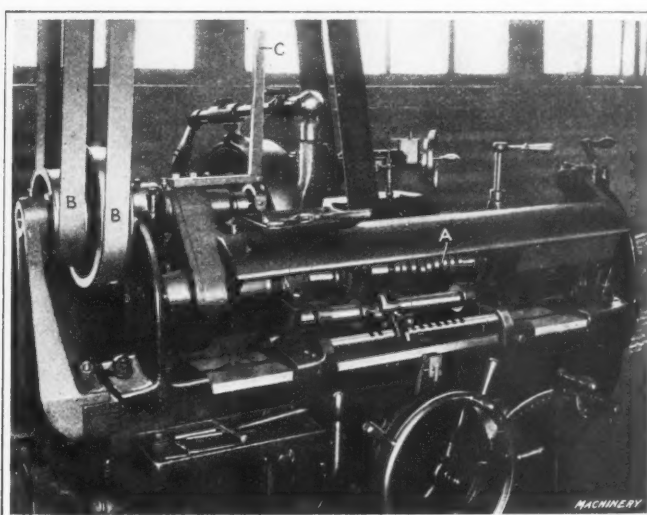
Landis Cam-shaft Grinder with Special Two-speed Drive to provide for slowing down Wheel to obtain Final Finish when grinding Cams on Cam-shafts
